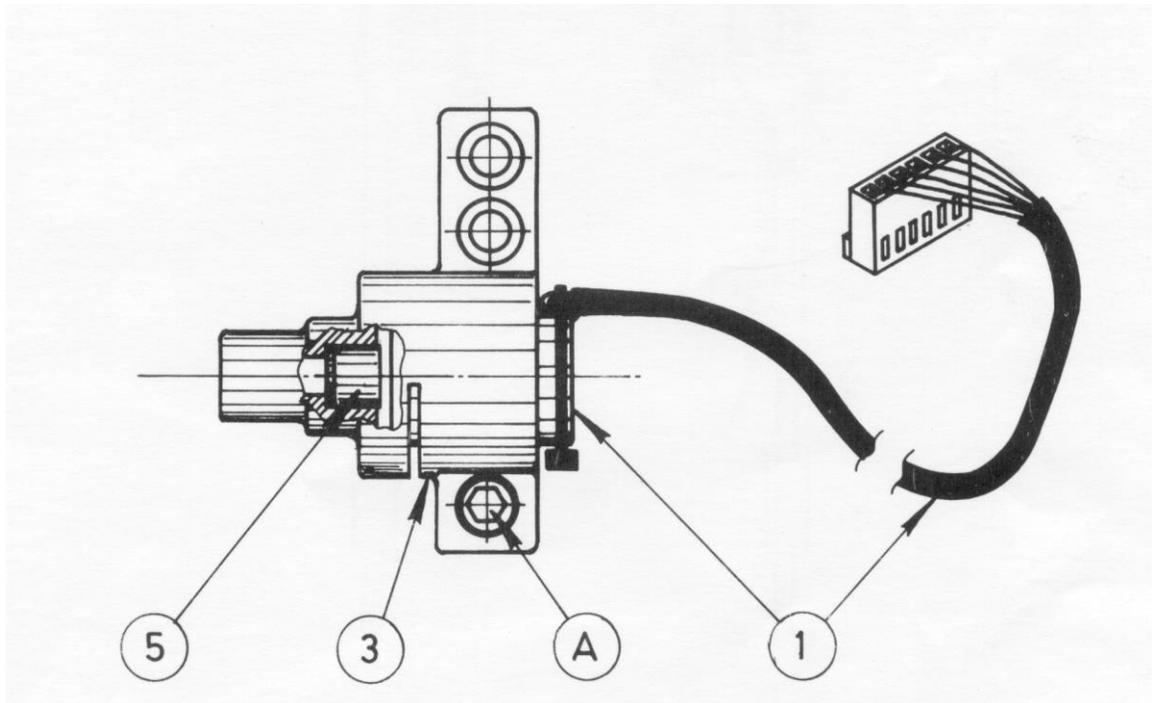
MAIN/Z LVDT ASSEMBLY (#4123-0414-0)
